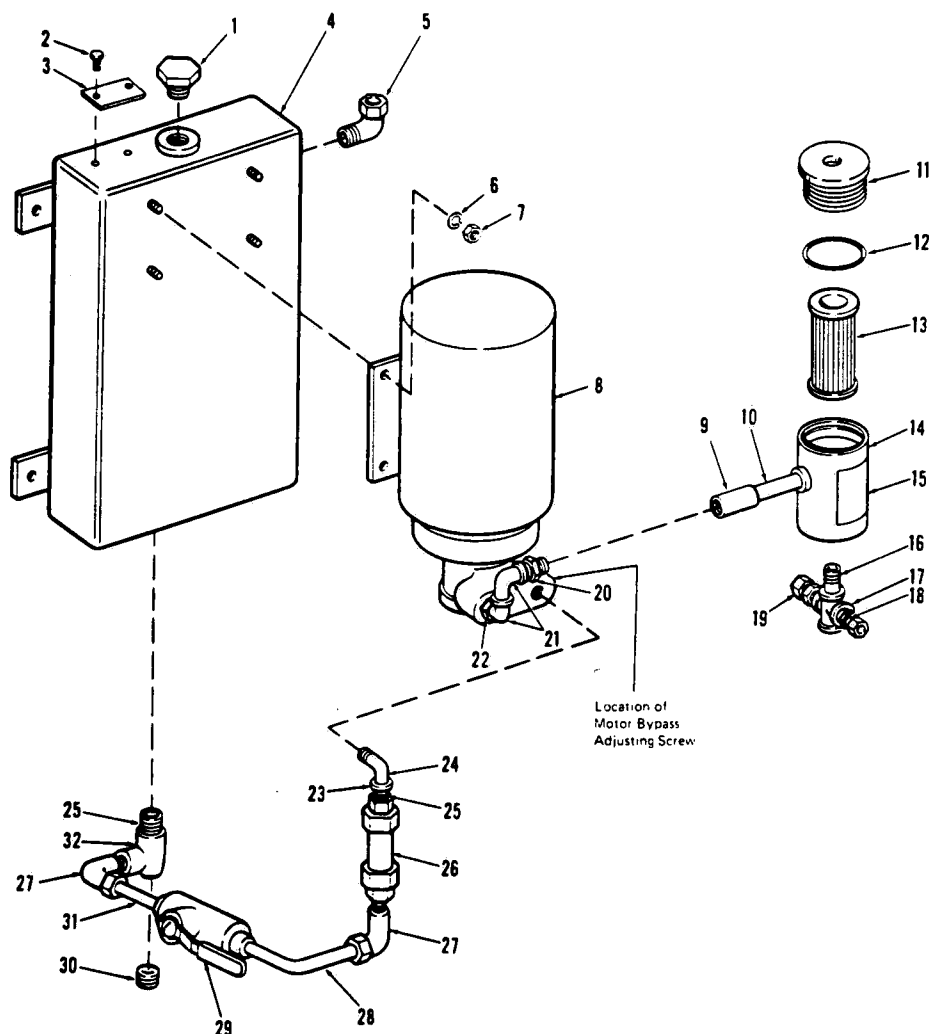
HYDRAULIC SUPPLY PACKAGE.
